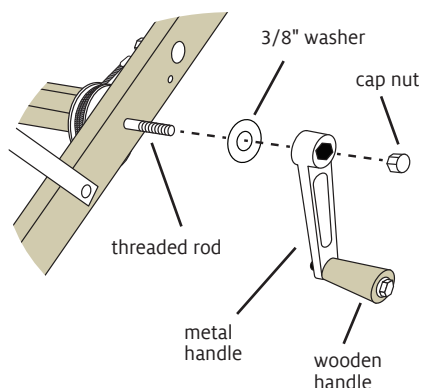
ATTACHING WARP BEAM CRANK HANDLE
